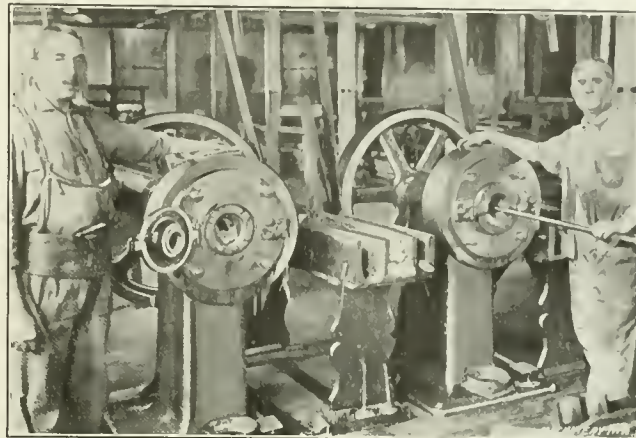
Starting Solid Gold Wire in the Large Swaging Machines
